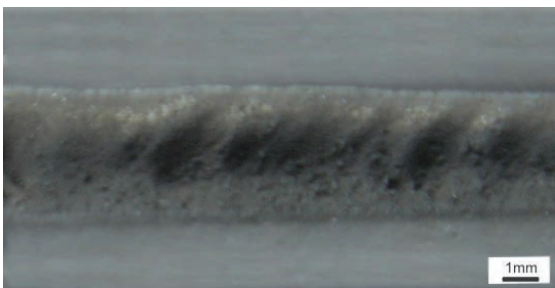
View of the MCMgAl12Zn1 cast magnesium alloy face weld after laser treatment with VC, scan rate: 0.75 [m/min], laser power: 1.6 [kW]
